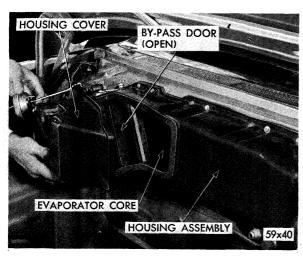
Removing or Installing Heater Core Housing Assembly
